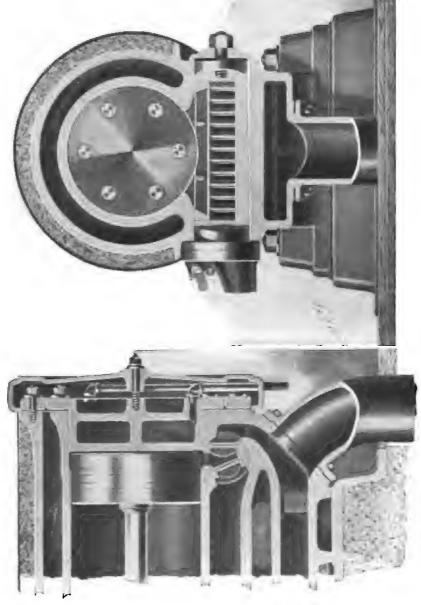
Cylinder of Wheelock Engine, Fig. 214.
